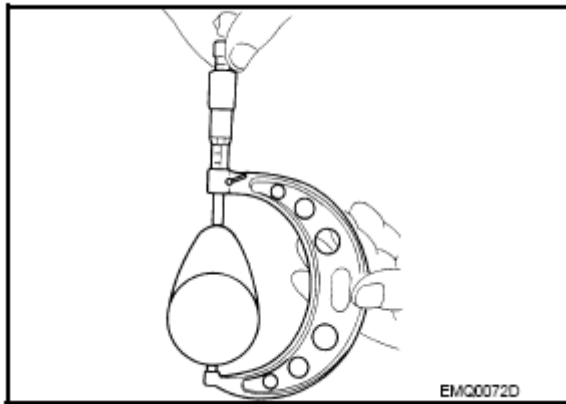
Measuring Camshaft Cam Height Using Micrometer
